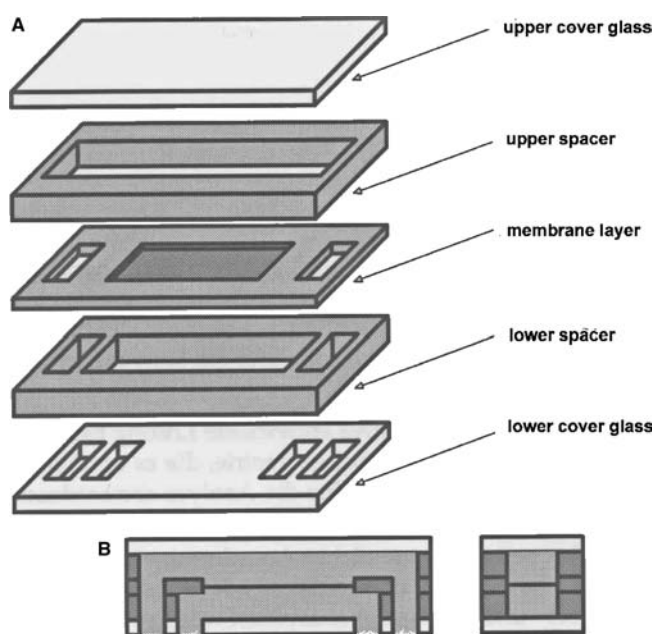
Exploded view of the single cell reactor and assembly. [9]
